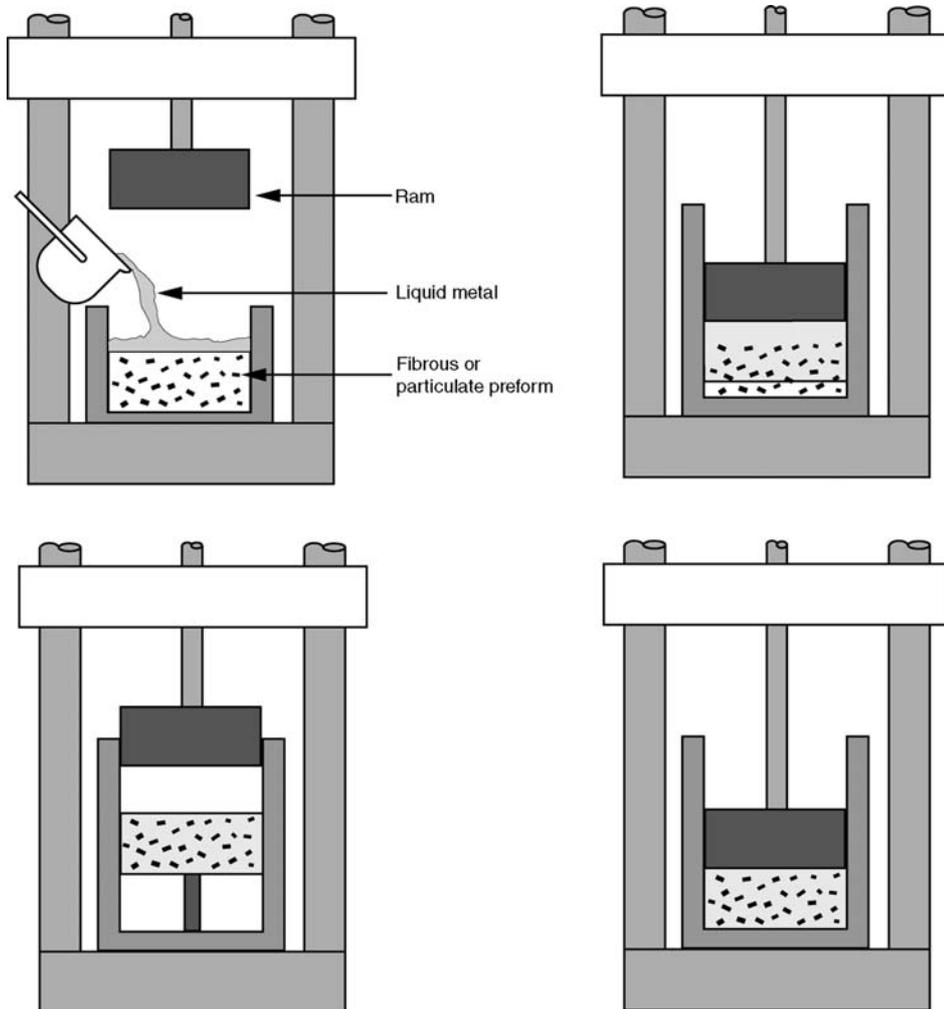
Schematic representation of squeeze casting process. Courtesy of N. Chawla
